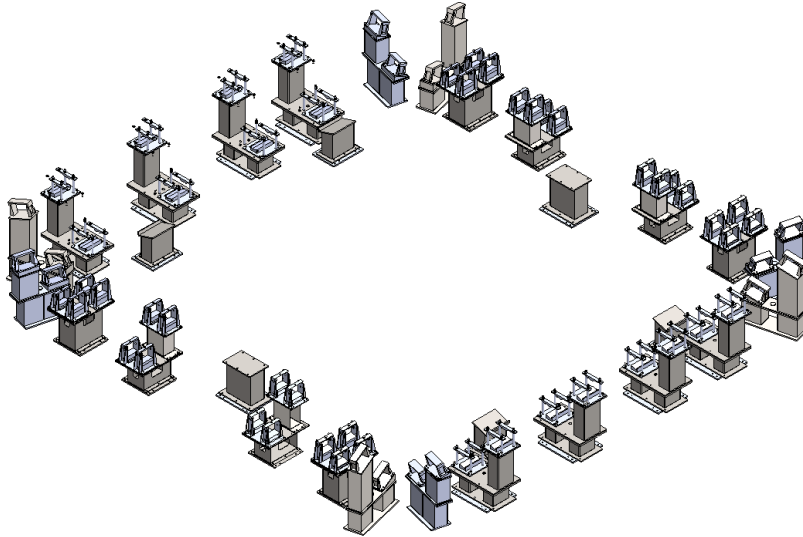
Overview of the assembly of welding fixture for SCC case
